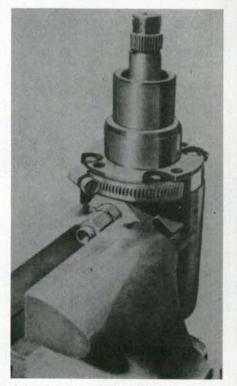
A large hose clamp may be used as shown to align upper cover to valve body before tightening retaining screws.
